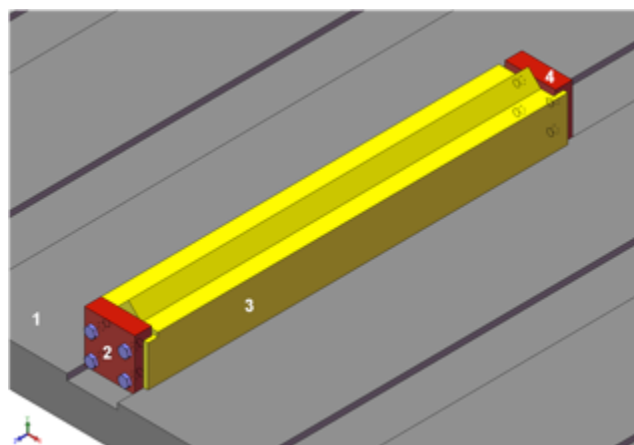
Positioning of the air cushion guide on the workplane of the machine
